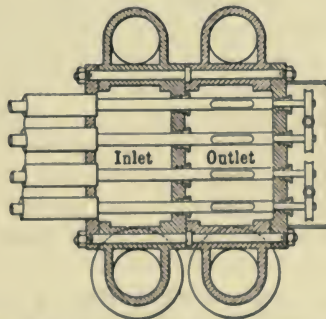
Supply and discharge chambers with gearing for rotating tubes.
